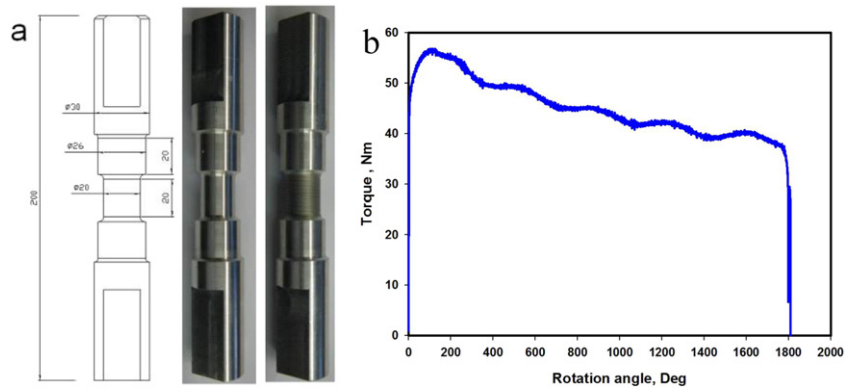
a) Schematic drawing of the torsion test specimen dimensions and the specimen before and after torsion test. b) Torque versus rotation angle for torsion test.
